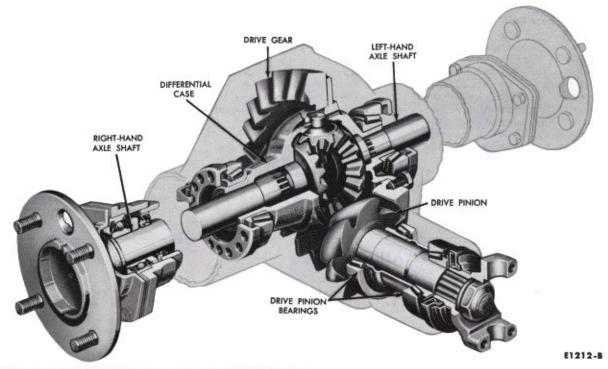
Typical Rear Axle Assembly—Used With Six Engine
